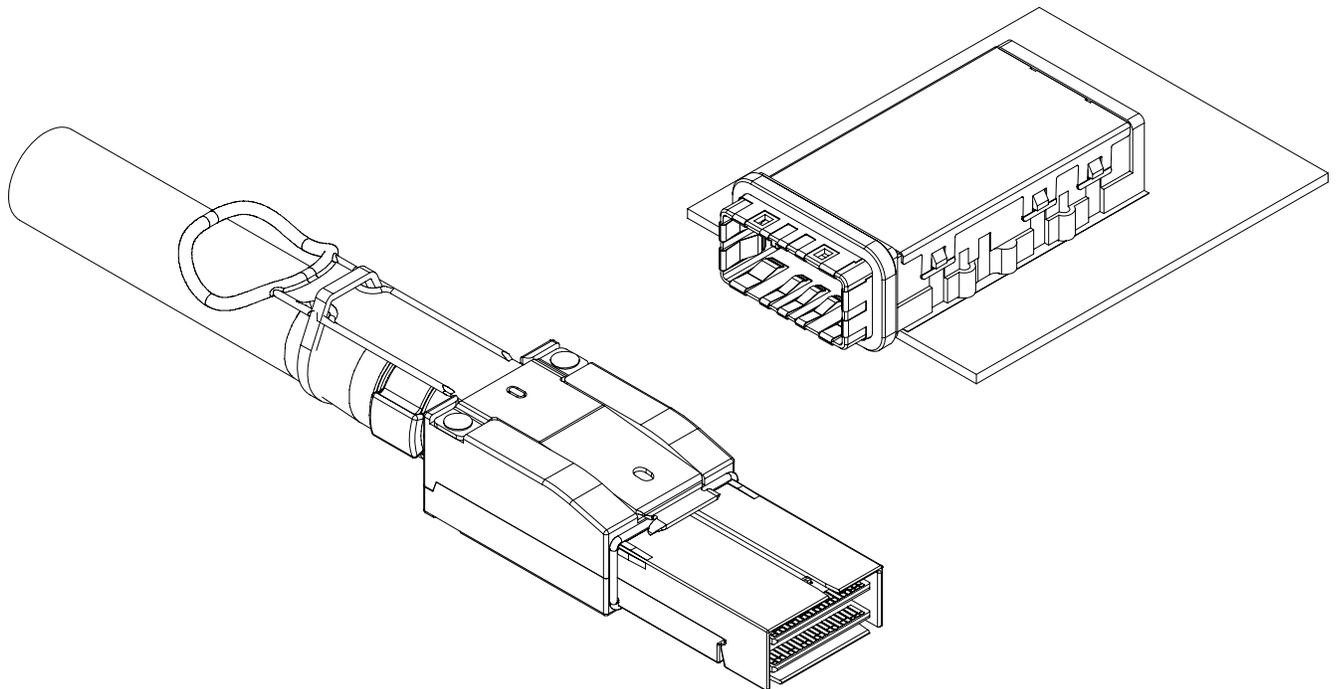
General view, CXP Cable Connector & Housing Assembly, w/o heat sink
